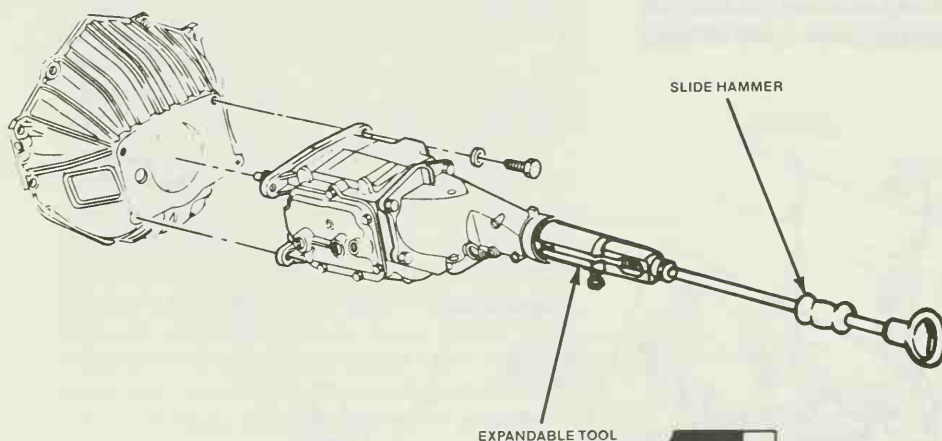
The old seal is removed with an expandable tool and a slide hammer. (Chevrolet Motor Division of General Motors Corporation)
